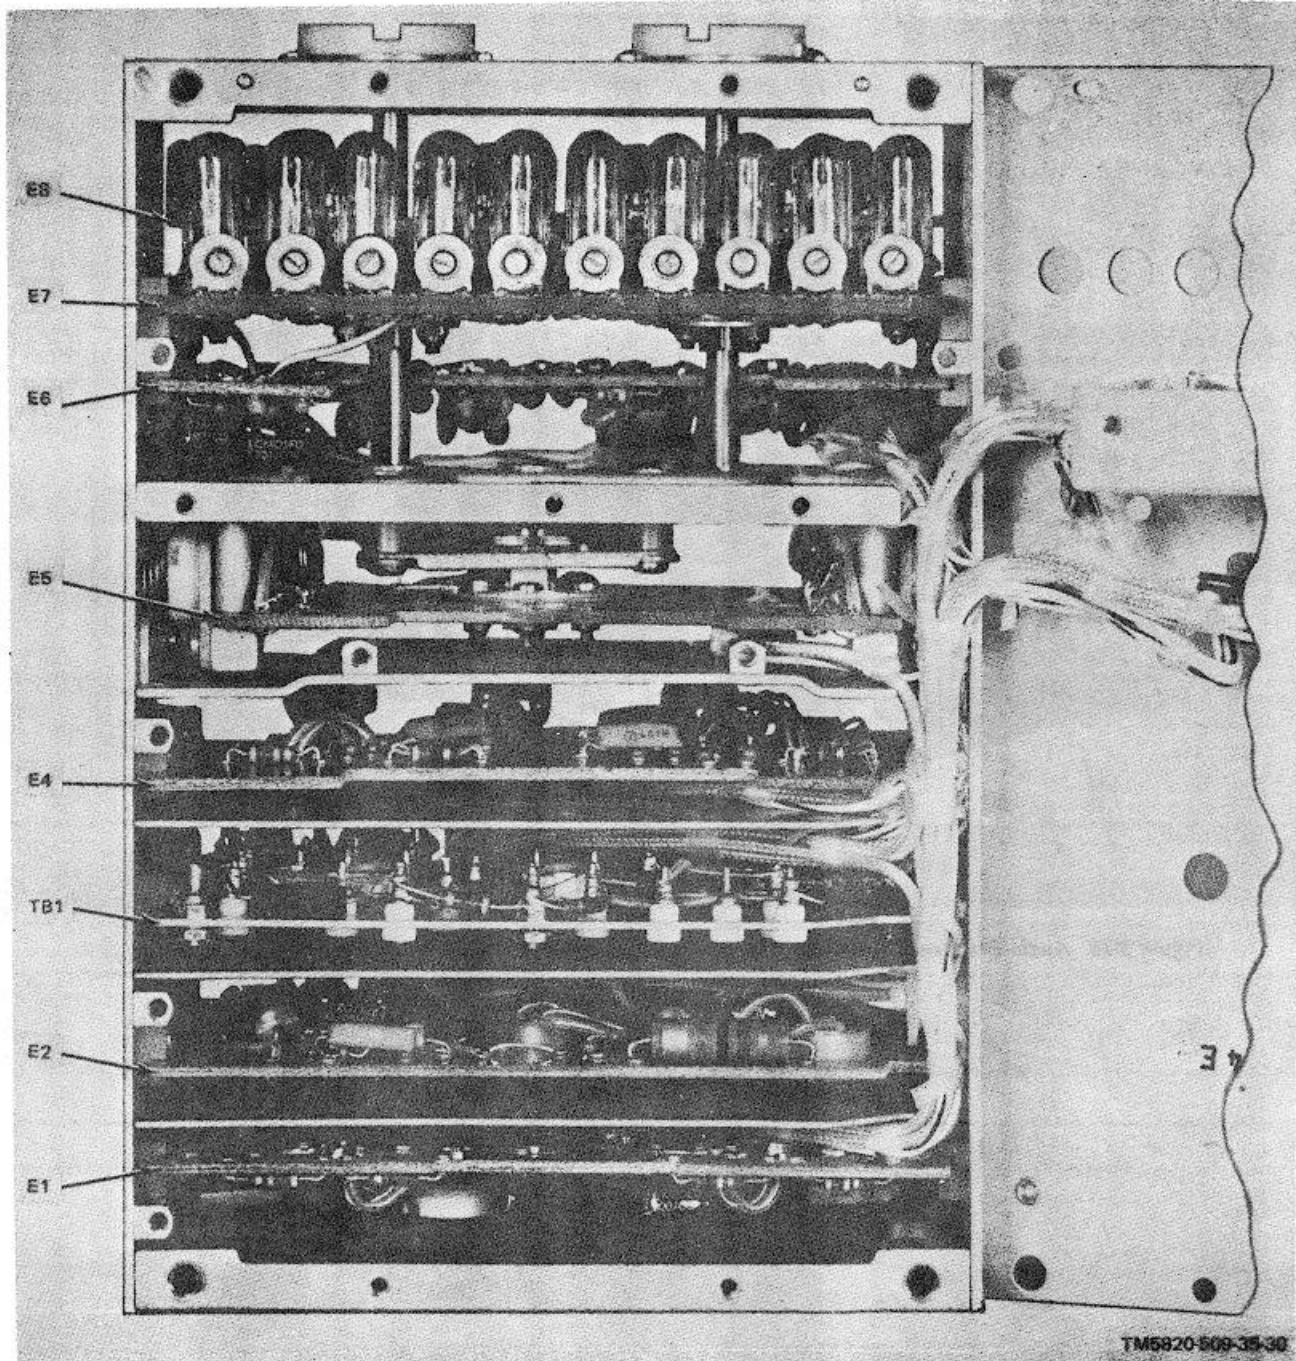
Oscillator Control C-4311/PRC-47(A8A7), Bottom View, Location of Subassemblies.
